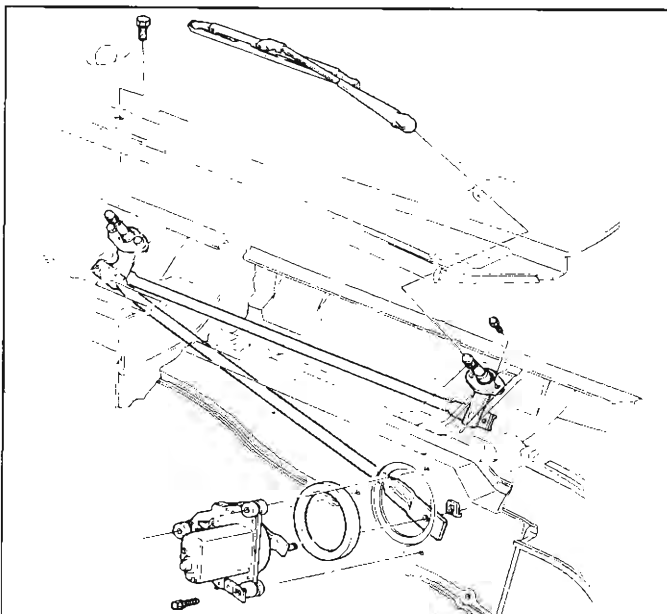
Windshield Wiper Motor and Transmission Assembly (Chevelle)
